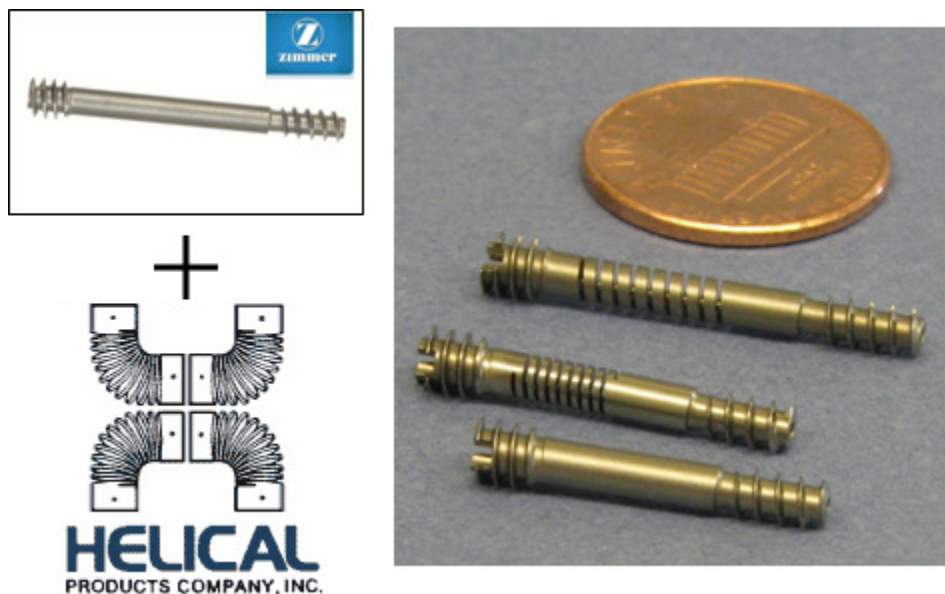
Prototyped screw of the helical coil cut design using solid screw (top left) from Zimmer®. The helical coil cut was made from Helical Products Company Inc.
